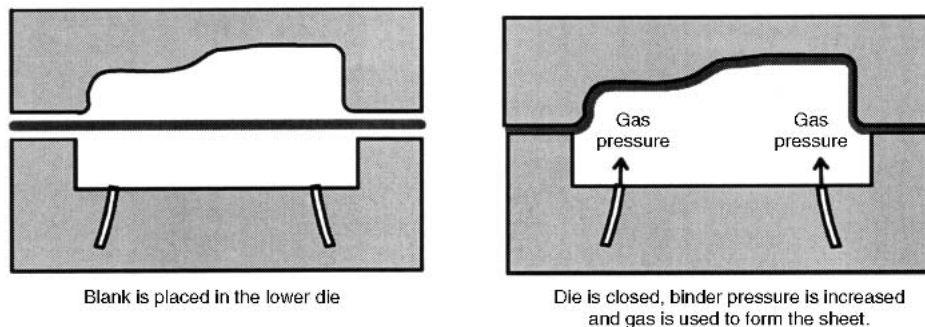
Schematic of a single-sided SPF tool shown before and after gas pressure forming
